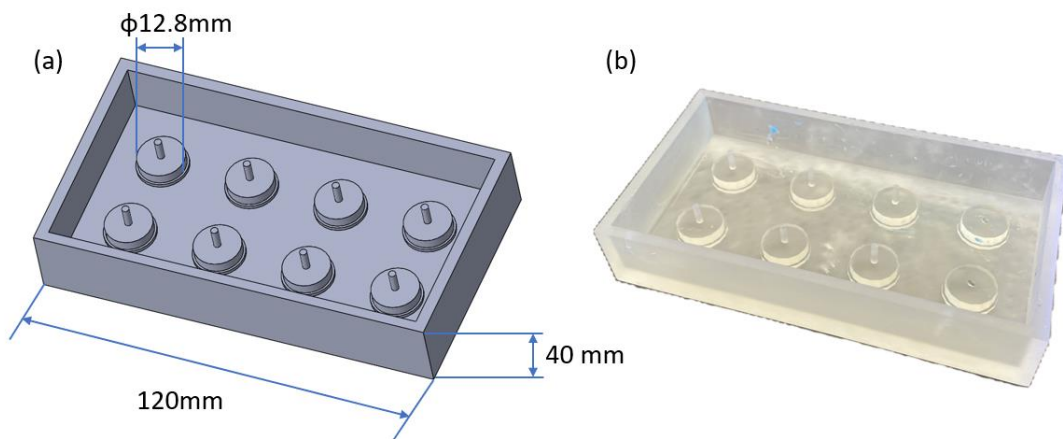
Rigid mold for FSM: (a) CAD and (b) 3D printed part by Object 260.
